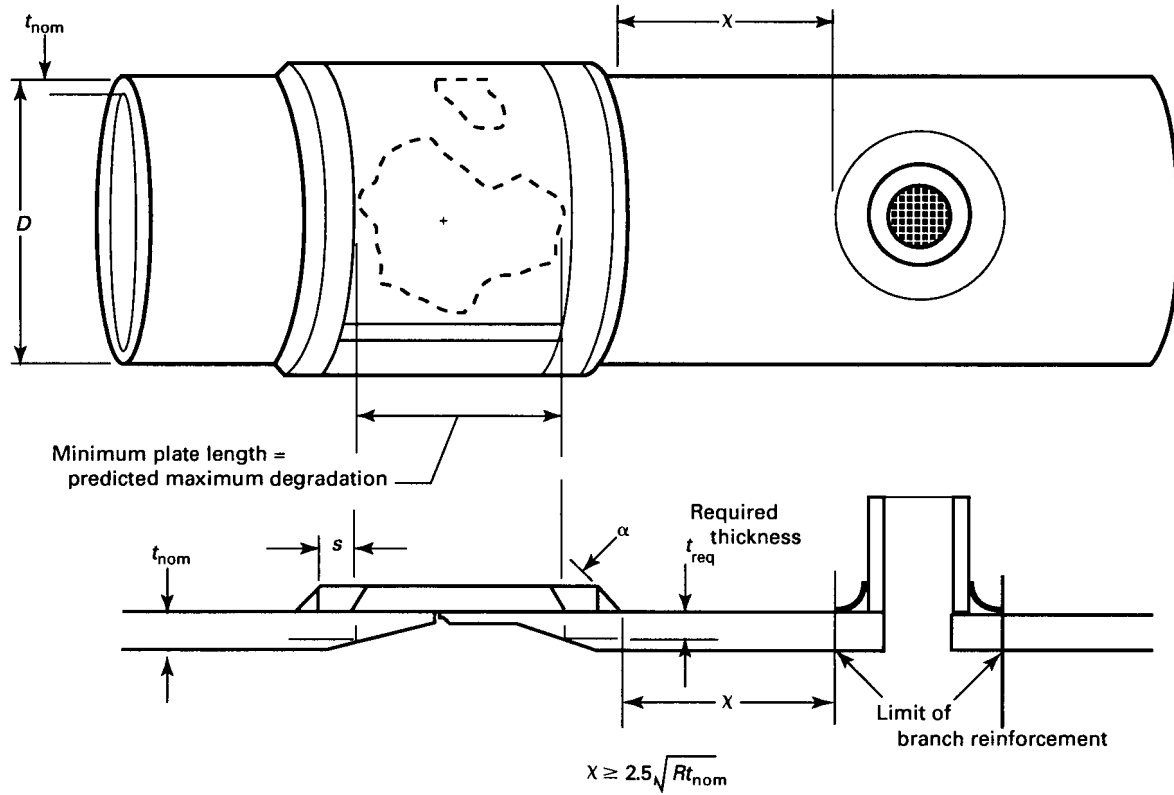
DESIGN DETAILS — TYPE B FULL-STRUCTURAL SLEEVES
